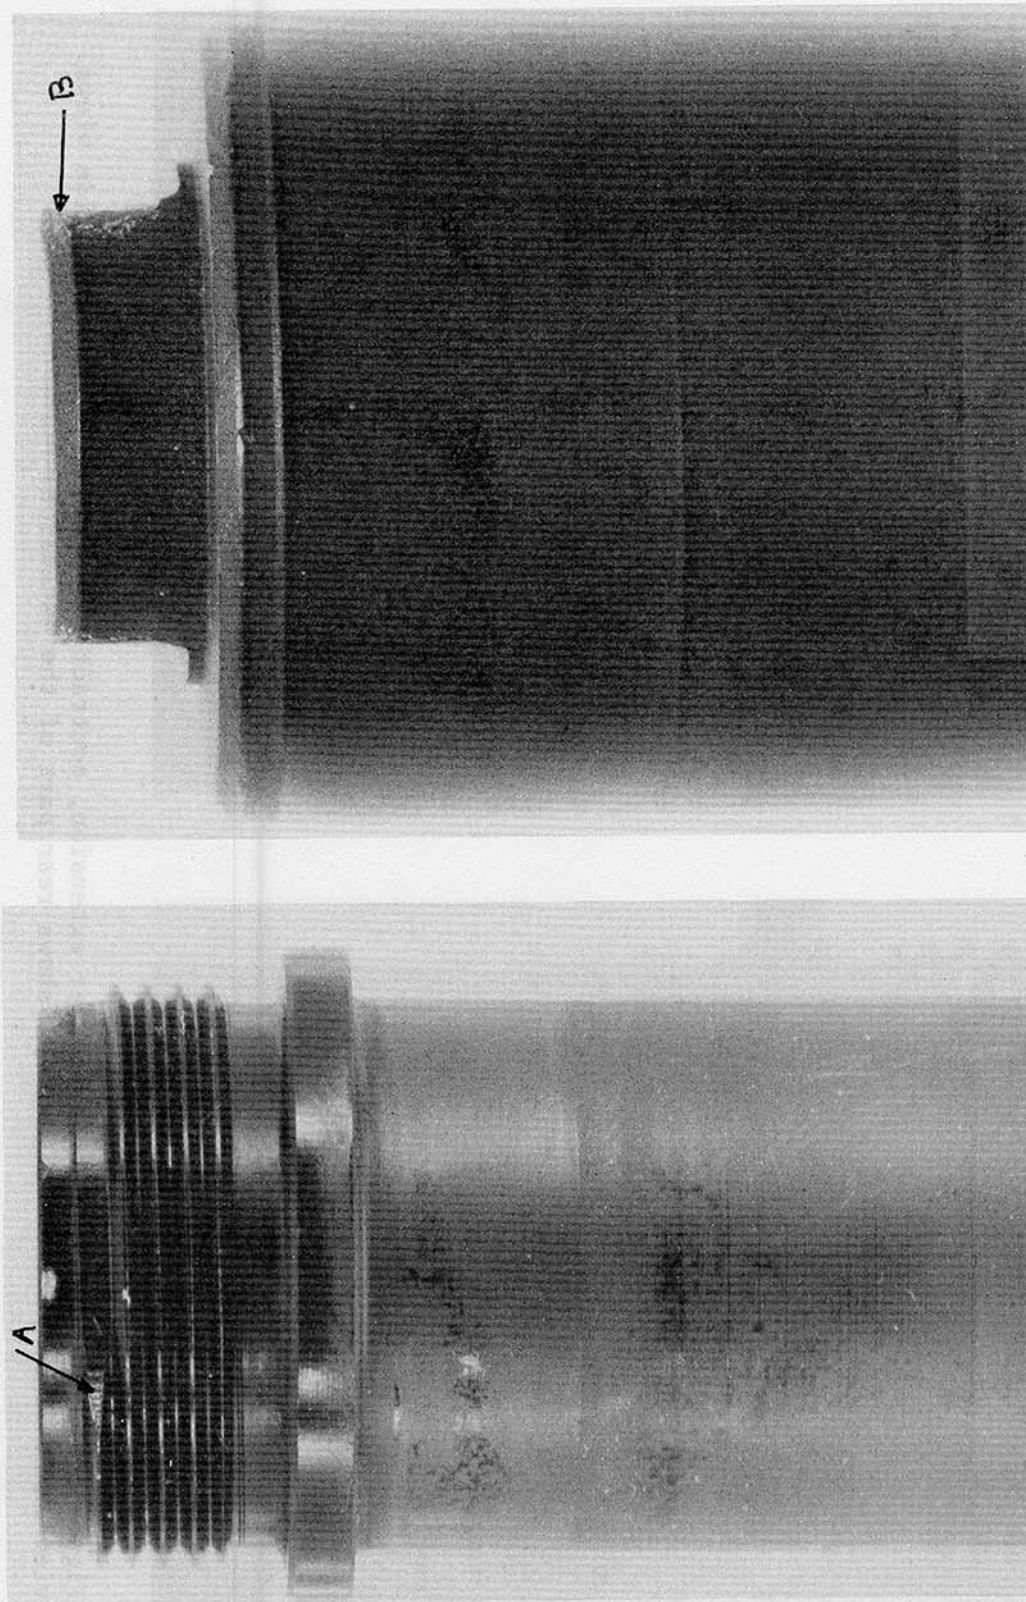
Test rifle lower receiver extension side views. Left view shows front part and right view shows rear part of the extension.
